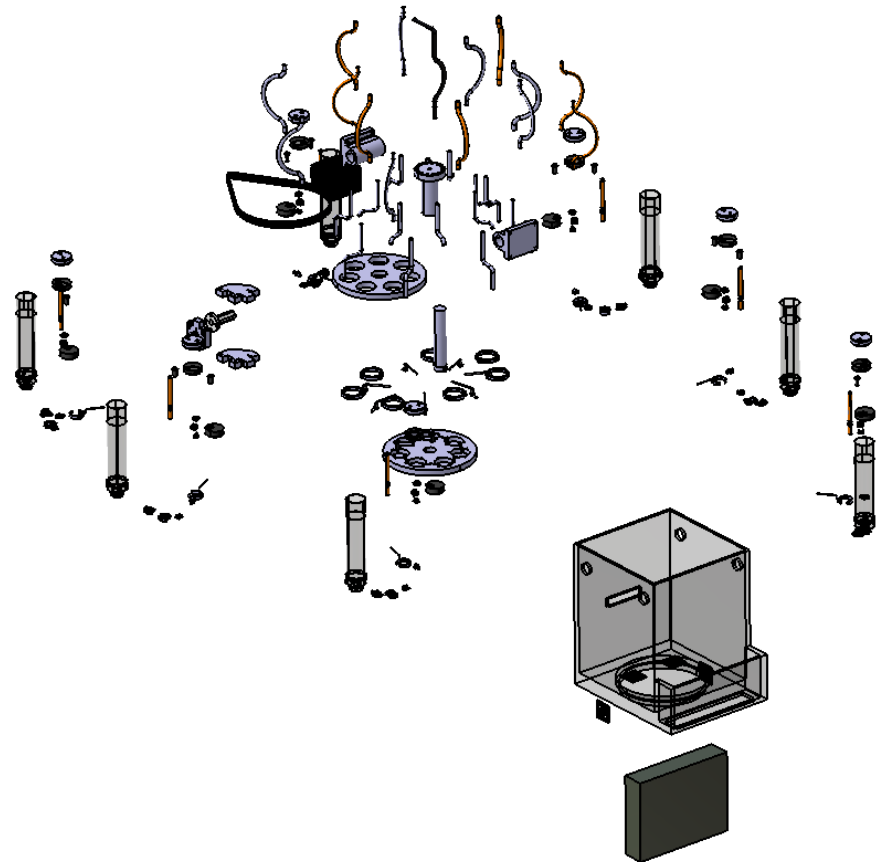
M²-3D Printer Nozzle Deposition System – Exploded View
